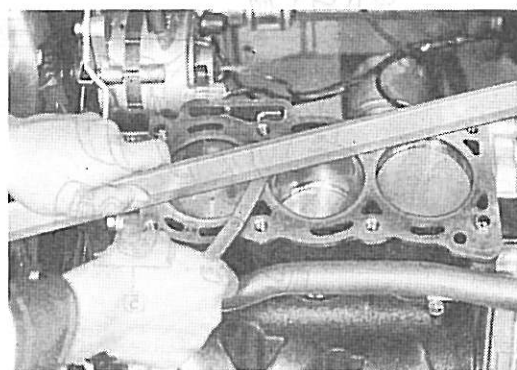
Checking Cylinder Block Top Surface for Distortion
